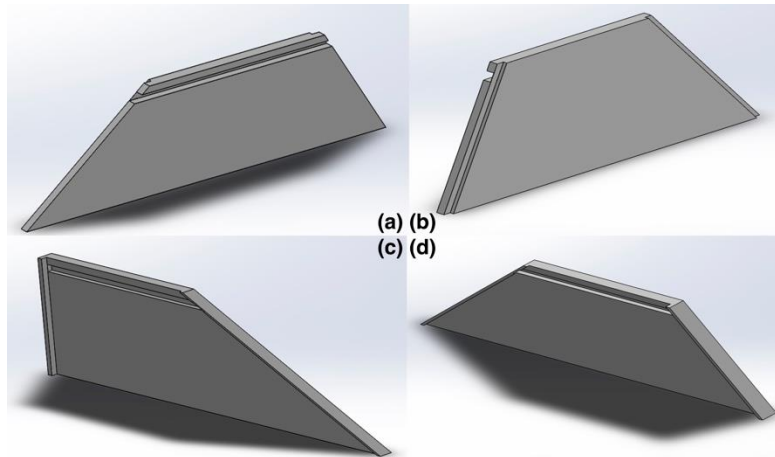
(a) back shield (b) front shield (c) left shield (d) right shield.
